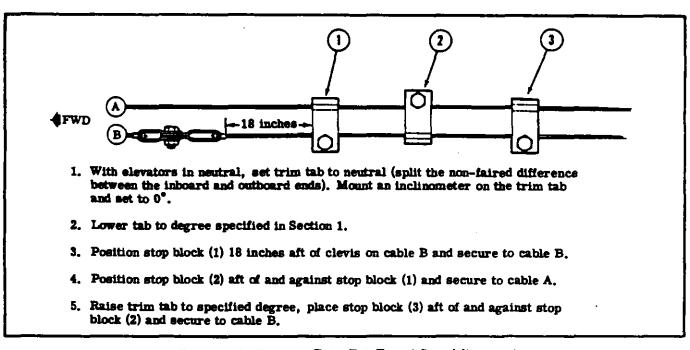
Elevator Trim Tab Travel Stop Adjustment
